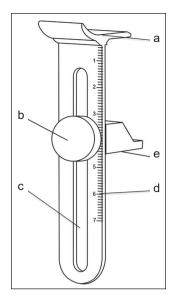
Mouth opening maintenance device. Front view with identification of the constituent elements. a, body; b, tightening knob; c, sliding channel; d, millimeter ruler; e, dental support for mandibular opening.
